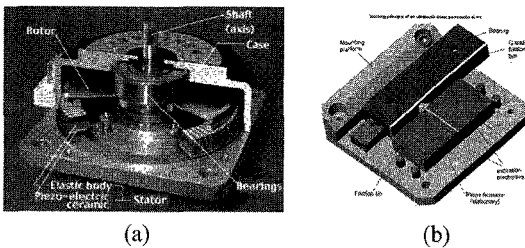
Structure of ultrasonic motor (a) ring type (b) linear type
